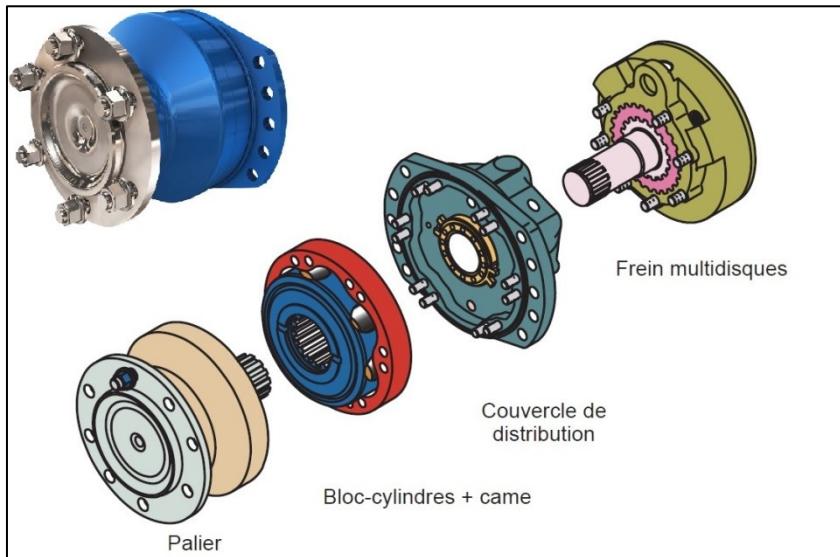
Illustration of the assembly of a MS02 hydraulic motor fabricated in Brno [3].
